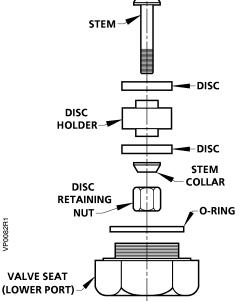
Water Mix Screwed-end Valve Disc Replacement.
